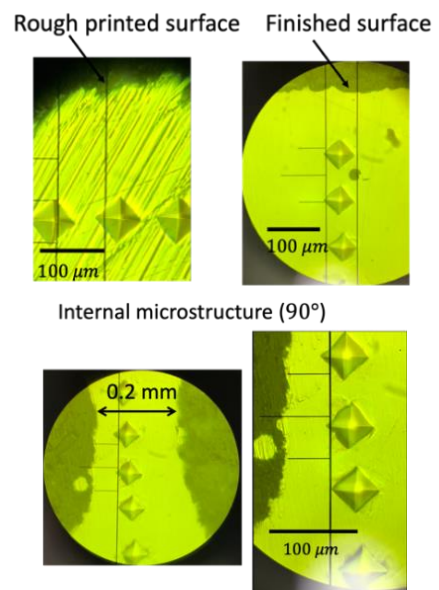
Microhardness of the LPBF IN718 and machined parts
